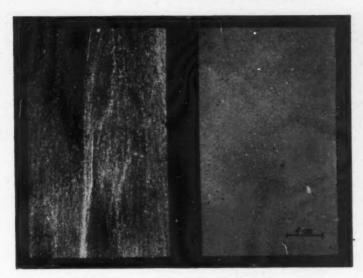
(left) (x 1) Appearance of the two faces of the same sheet of A7 alumninium (99.7 per cent.), anodized, obtained by rolling a pre-extruded slab; the outer shearing zone has been removed from one of the faces.
